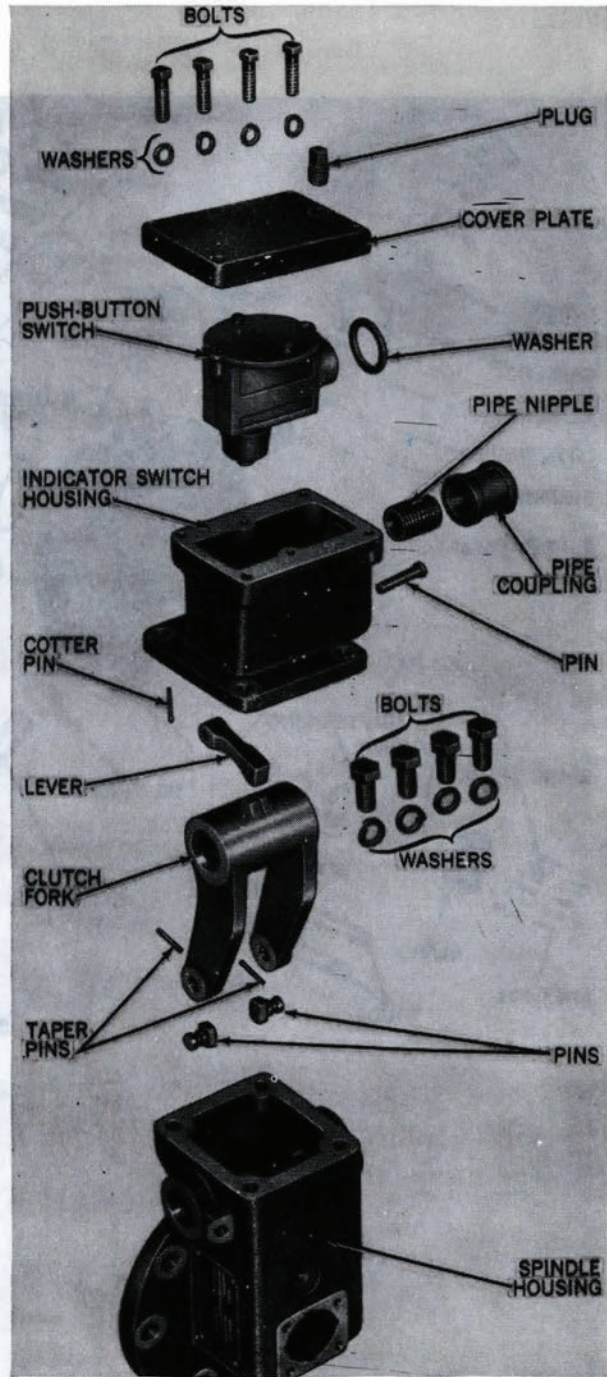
Gyro Setting Mechanism Retraction Unit Disassembled.
